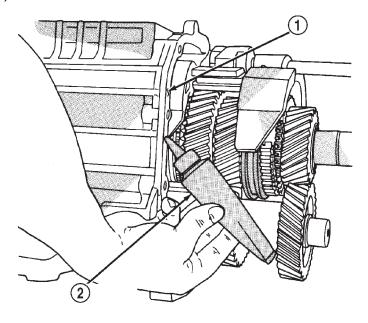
Lubricating/Positioning Countershaft Front Bearing
